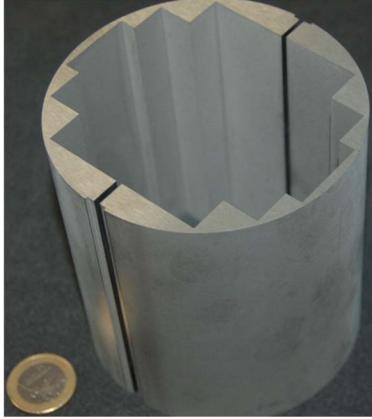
First test of electro-erosion of a pad of 100 mm.
